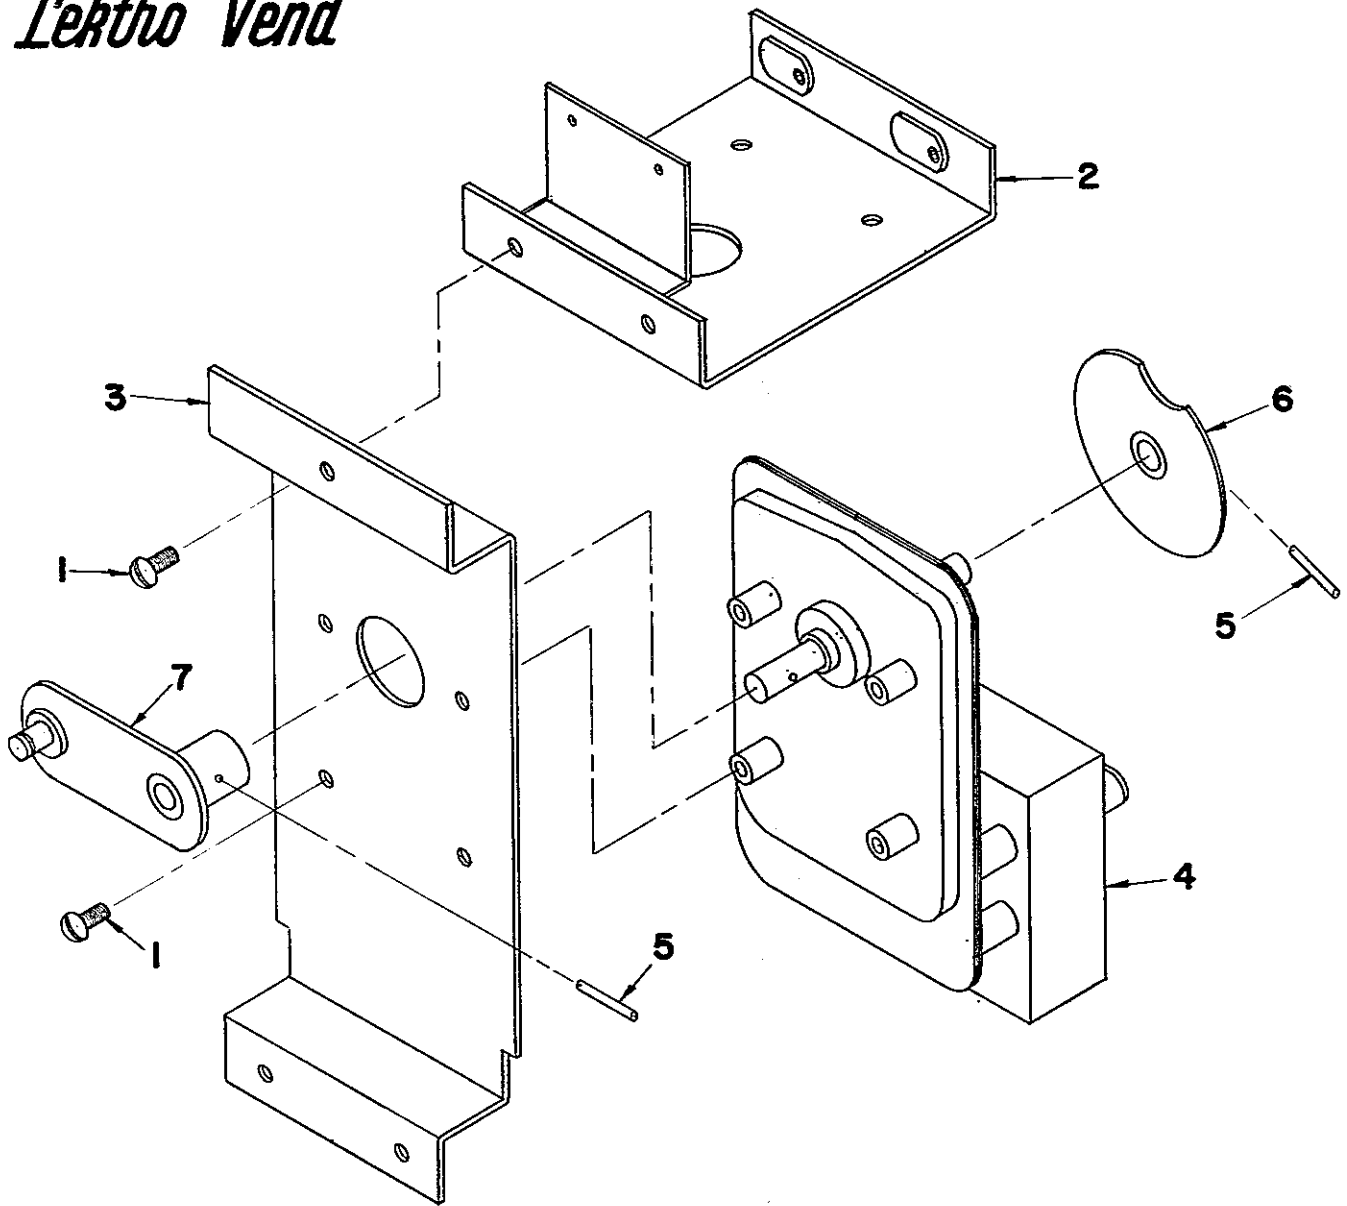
DRIVE MOTOR ASSEMBLY -- MINT
